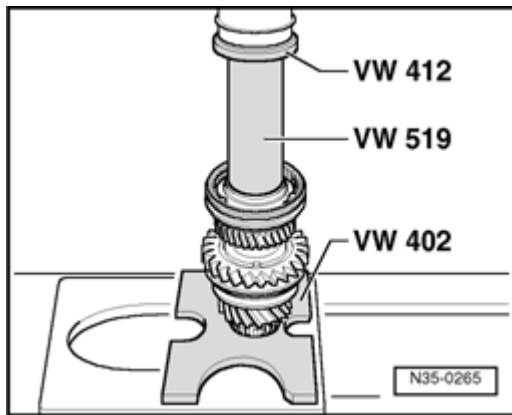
Pressing on 5th and 6th gear locking collar/synchro-hub
